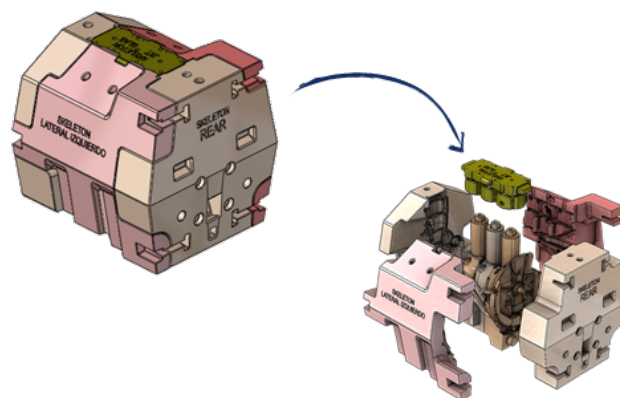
Exploded view of the cylinder block core package. Extracted from [9].
